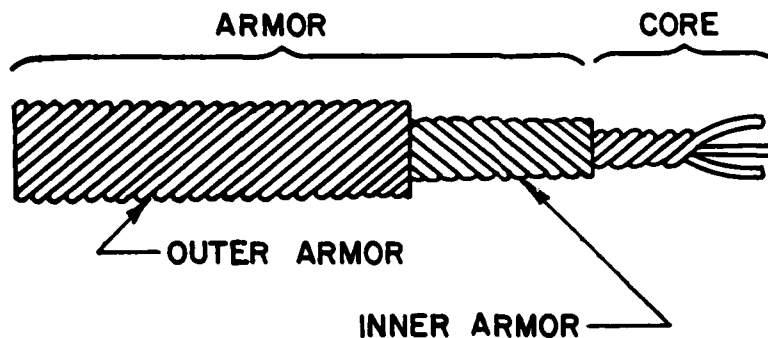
PARTS OF AN ARMORED E-M CABLE
